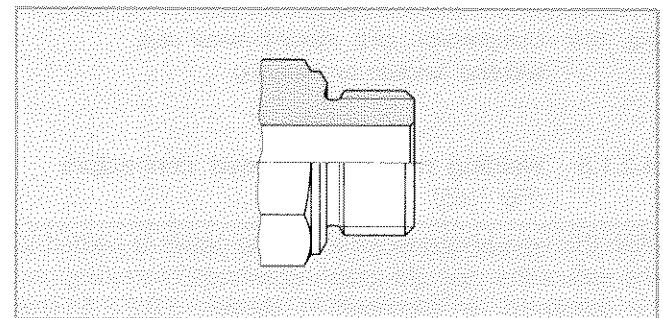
Sealing lip, metal-to-metal seal, undercut perpendicular to thread, the counterbore will be damaged by cutting edge
